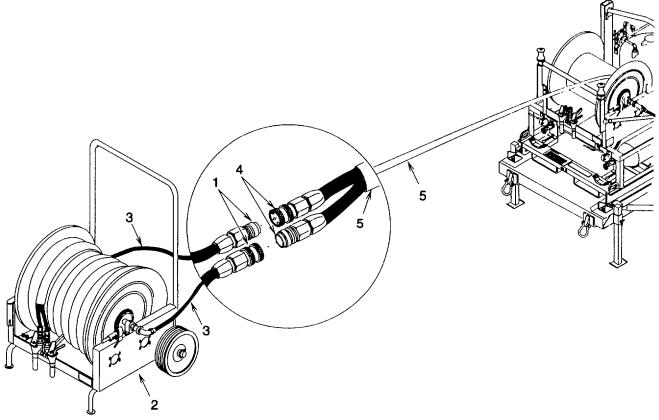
Auxiliary Mobile Hose Reel Cart Hose Connection
